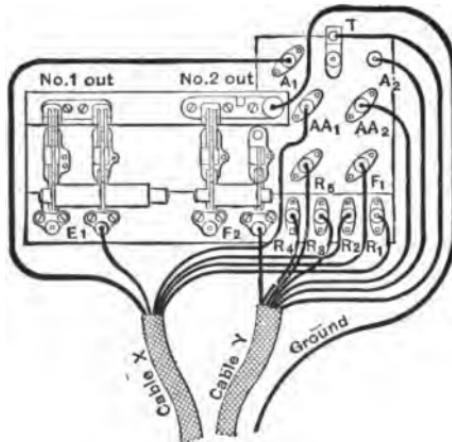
CONNECTING BOARD OF CONTROLLER.
